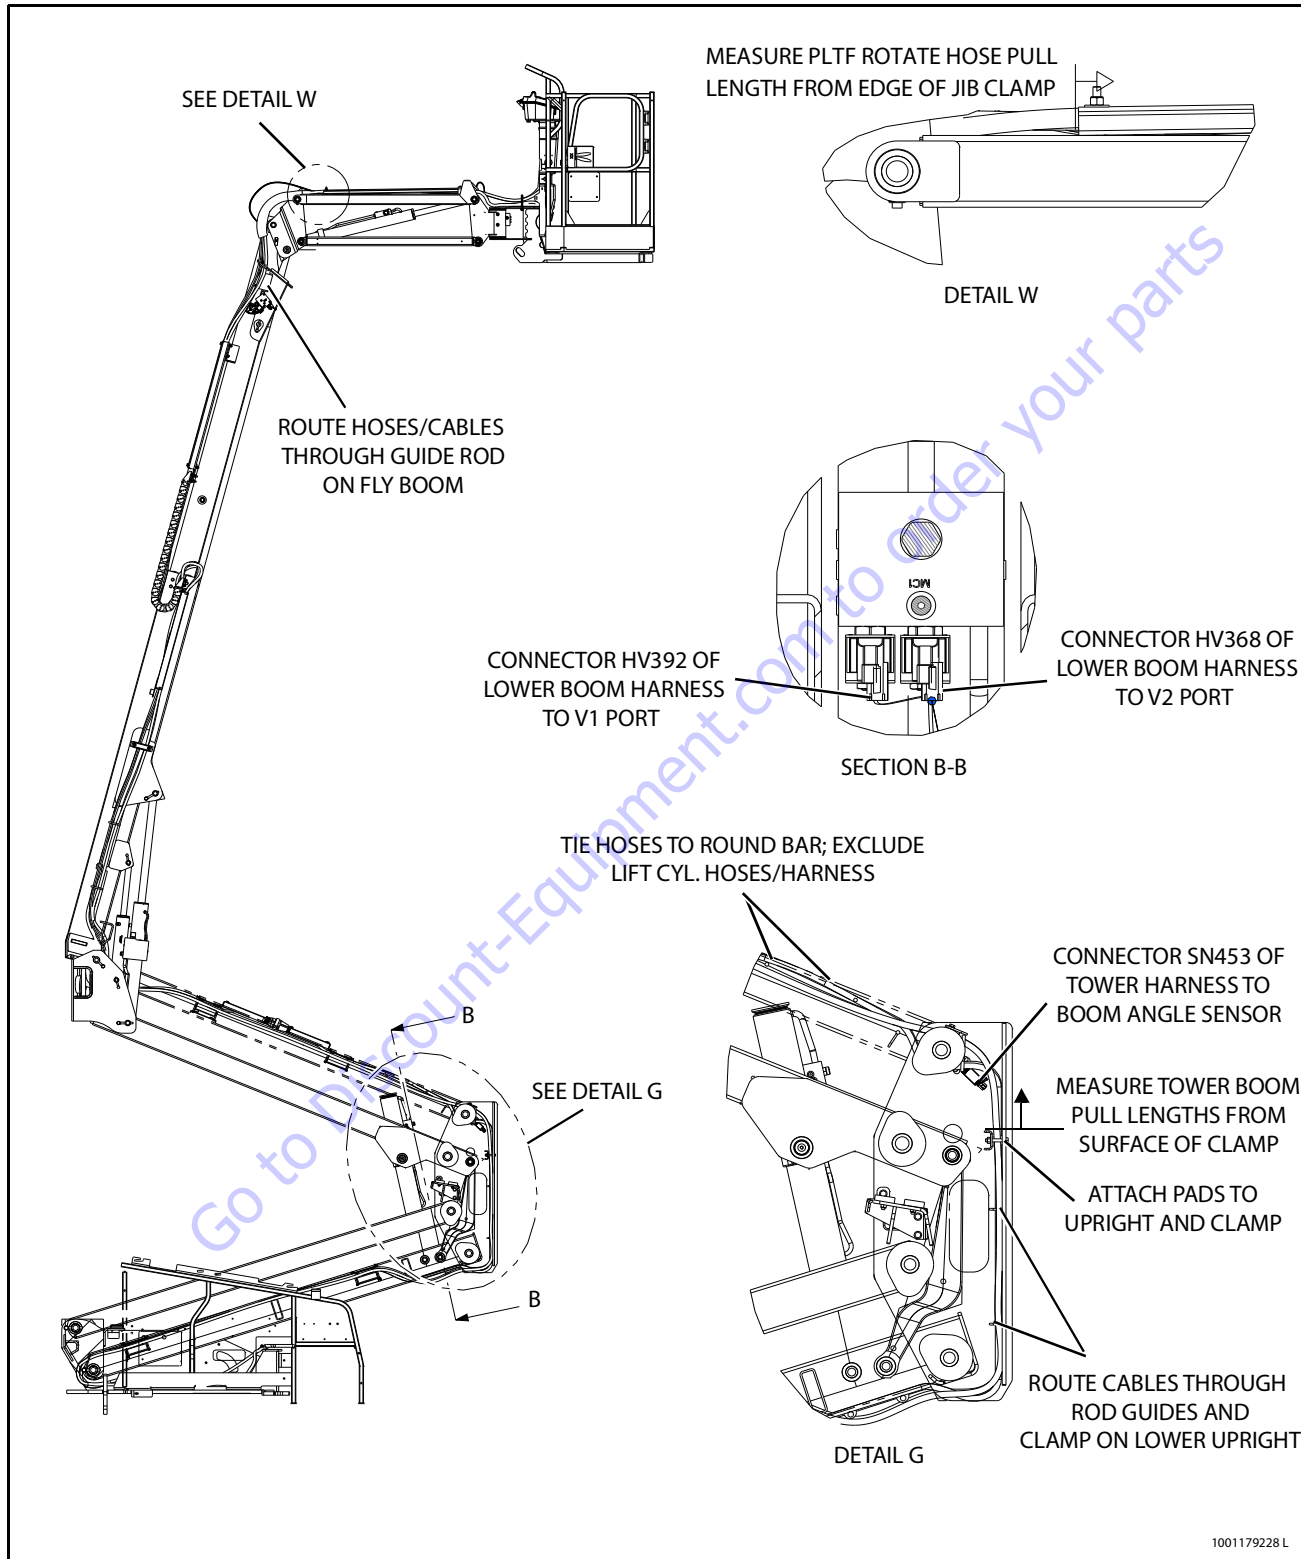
Cables and Clamps Installation - Sheet 2 of 8
